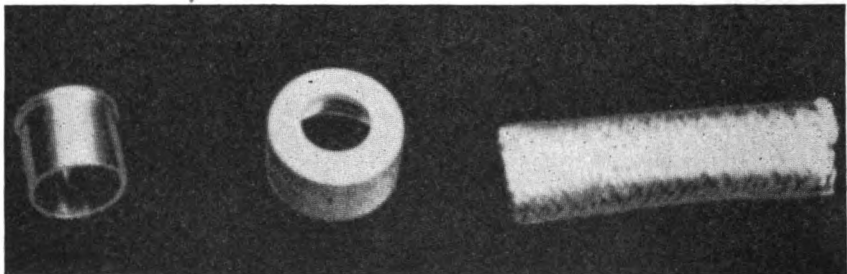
Flexible conduit ferrule, end shoulder.
